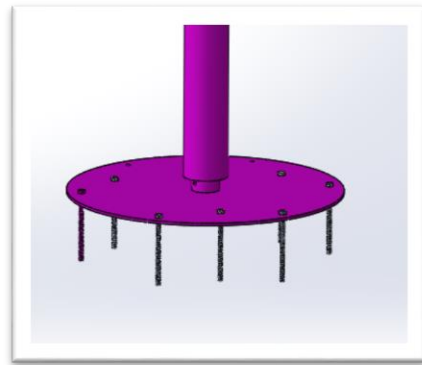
Rotating disc with cutting spikes (2, 4 and 6) Fig3.3 CAD view of rotating disc
